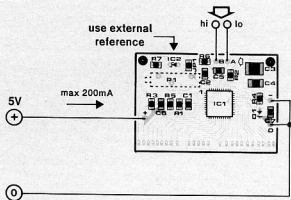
Track layout and component mounting plan of the printed-circuit board.
